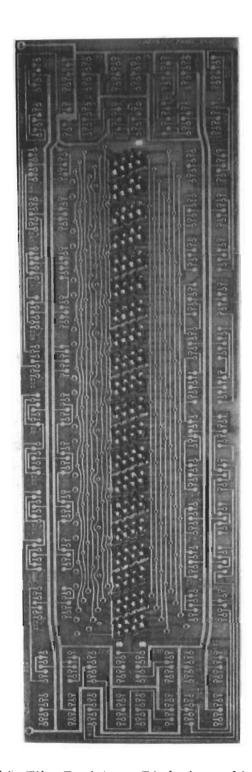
Thin Film Resistor - Diode Assembly - Front View
